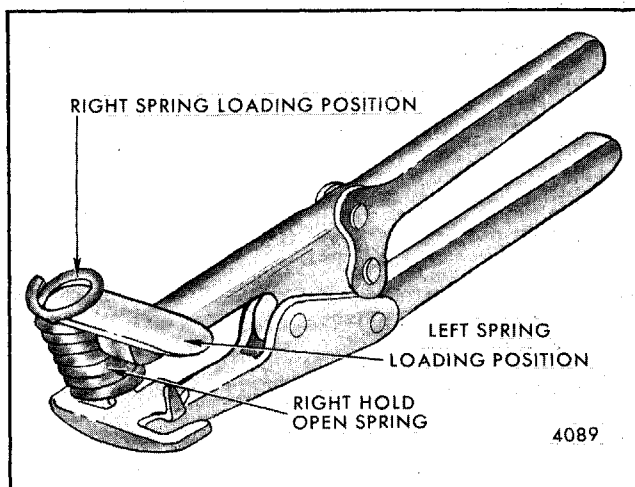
Hold-Open Spring, Loading Positions Using Tool J-23497 or Equivalent - "X" Styles
